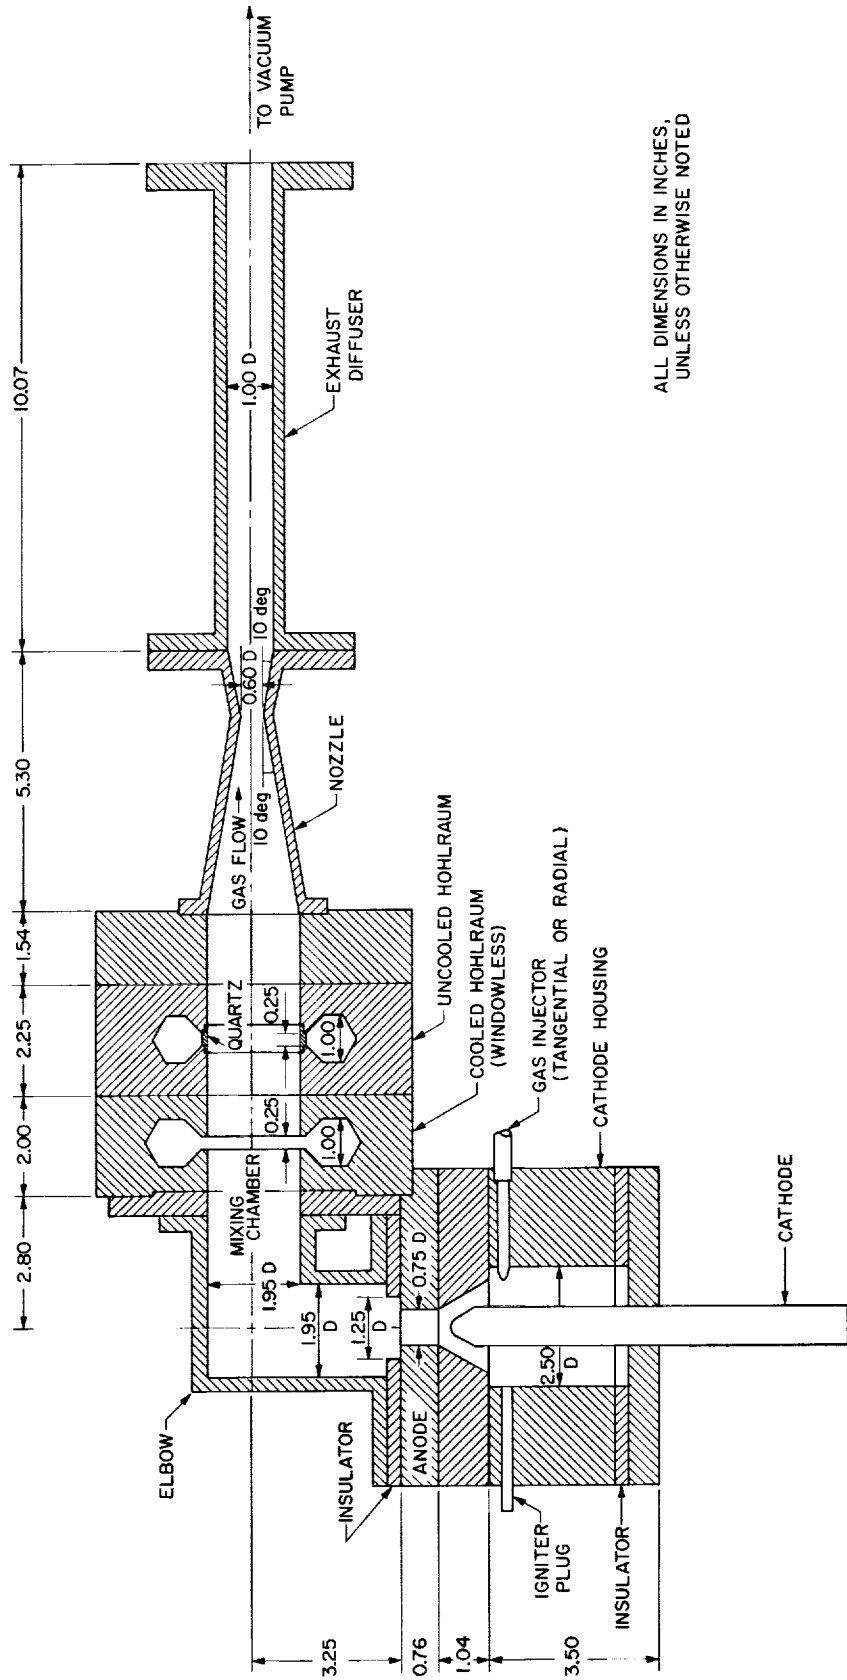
Ionized gas heat transfer apparatus showing location of hohlraums
